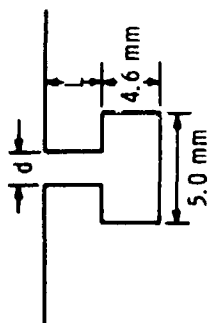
Instrumented Stator Blade Cross Section and Transducer Mounting Arrangement
